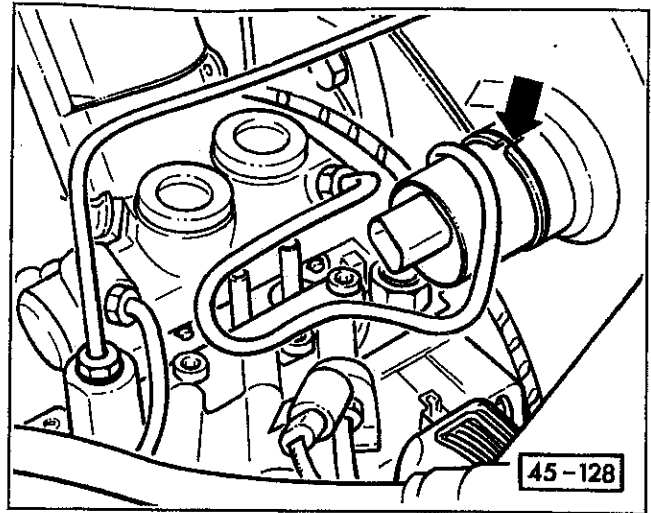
Install brake pedal position sensor so that groove (arrow) is 180° opposed to circlip gap.
